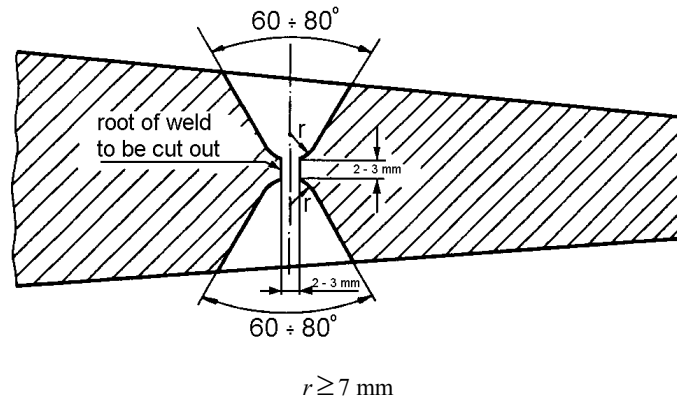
Welding groove for tip repair
